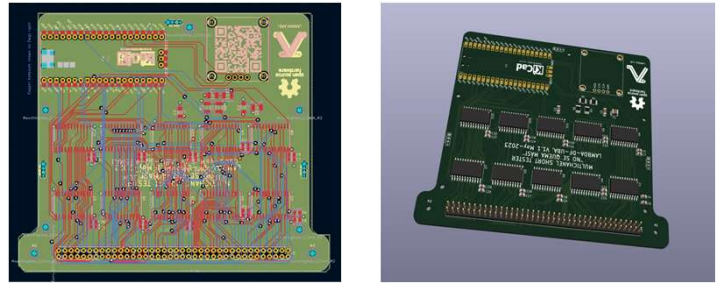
(left) The printed circuit board of the MCM Quick Tester (right) 3D view of the PCB
